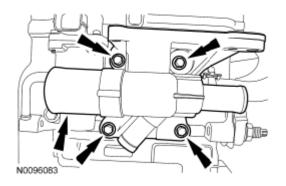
Locating Coolant Outlet Bolts Courtesy of FORD MOTOR CO.
